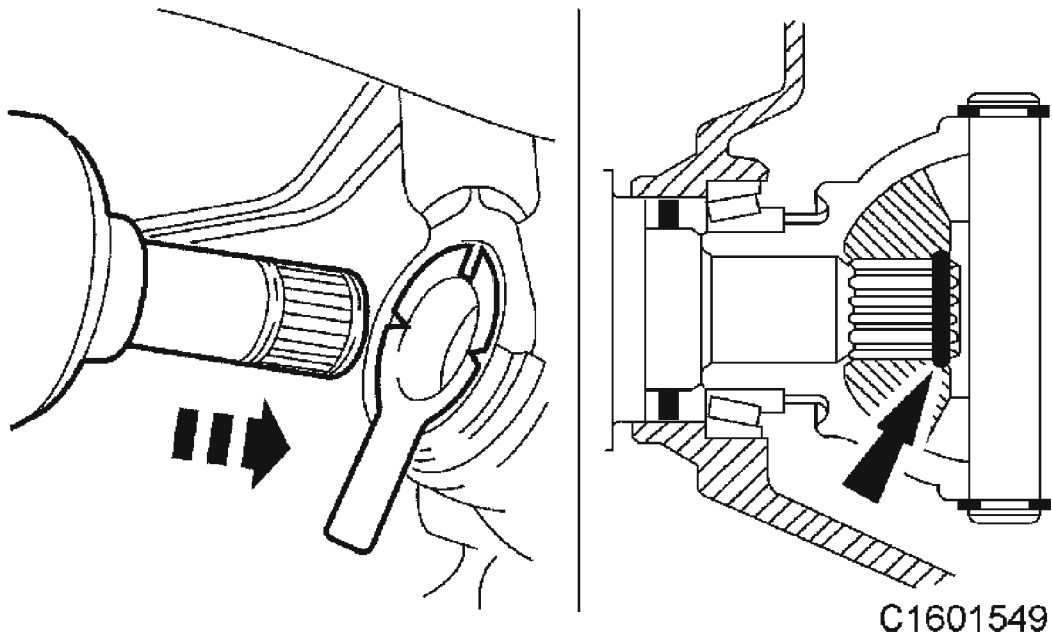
Installing LH Drive Halfshaft And Snap Ring Into Transaxle
